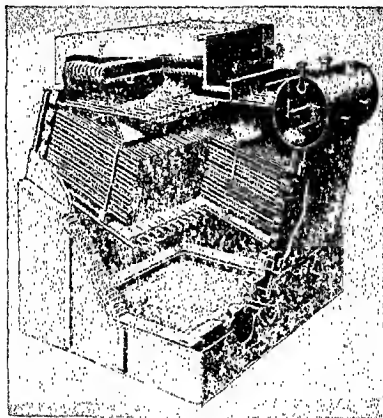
Sectional-header design, as built by several manufacturers for Liberty ships.
